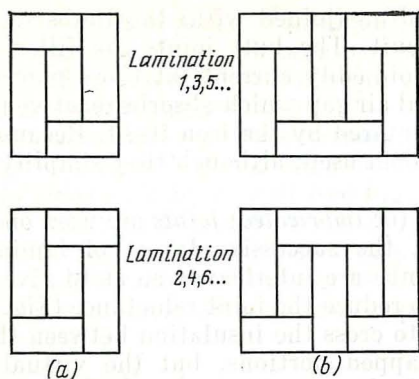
Imbricated (interleaved) joints in a magnetic core: (a) single-phase core-type transformer; (b) three-phase core-type transformer
